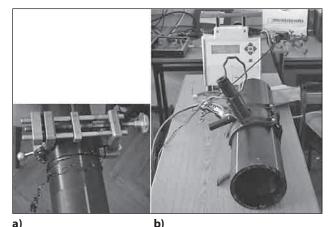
Surface preparation for welding: a) mechanical cleaning; b) join of the saddle pipe
